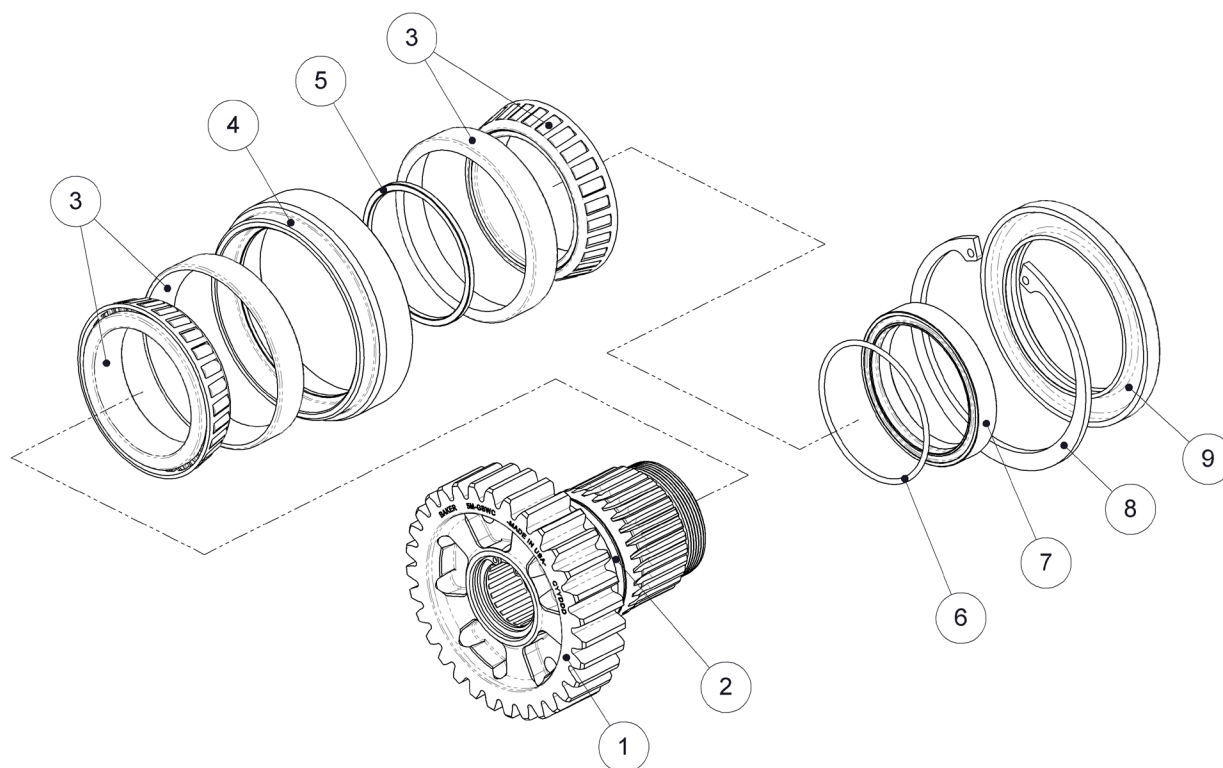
| EXPLODED VIEW, TAPERED ROLLER BEARING
